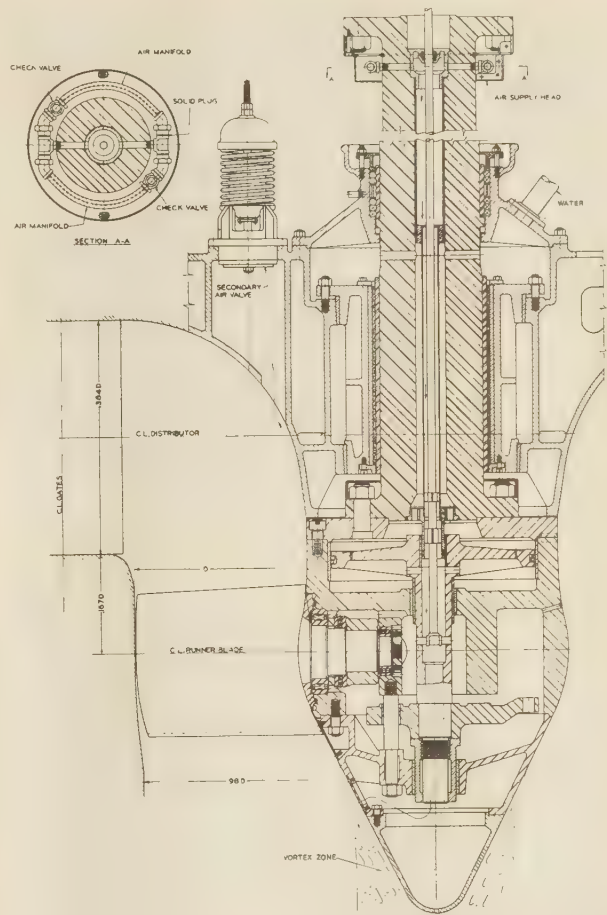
SECTIONAL VIEW SHOWING ARRANGEMENT FOR AUTOMATIC ADMISSION OF FREE AIR TO DRAFT TUBE
